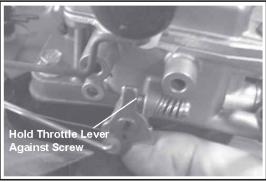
Holding Throttle Lever Against Idle Stop Screw.
